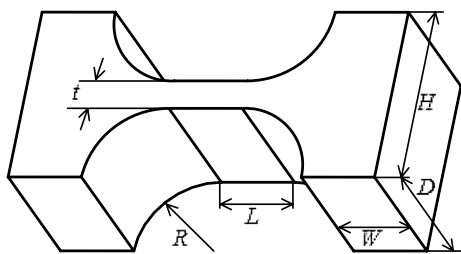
Geometrical parameters of a corner-filletted flexure hinge
